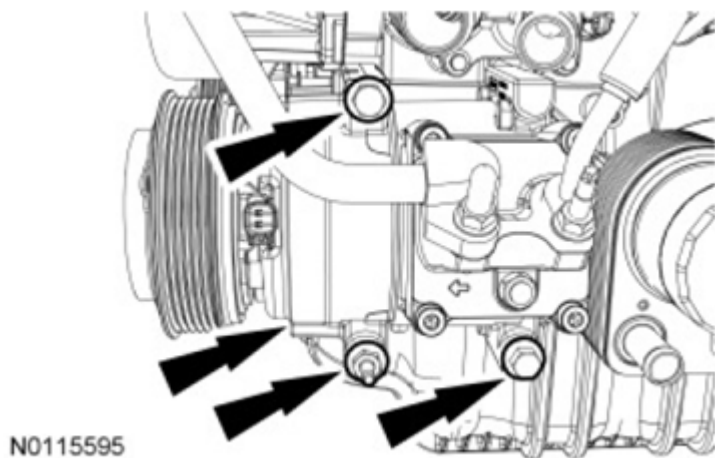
Locating A/C Compressor Bolts And Stud Bolt
